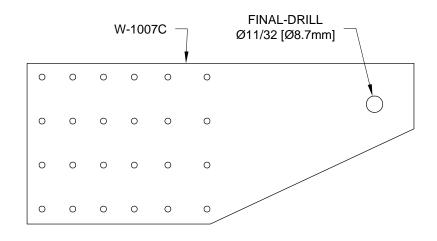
FINAL-DRILL REAR SPAR DOUBLER PLATE
